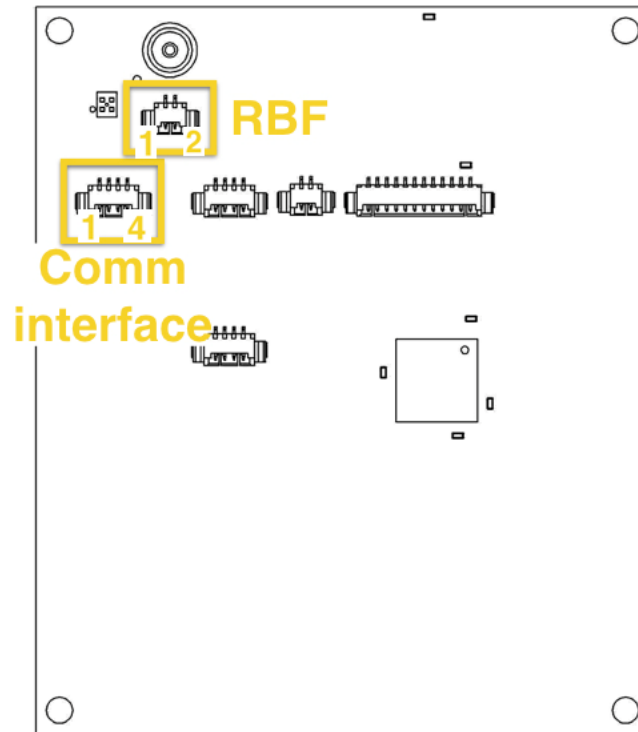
Remove Before Flight (RBF) Connector and Pinout – Bottom Side
